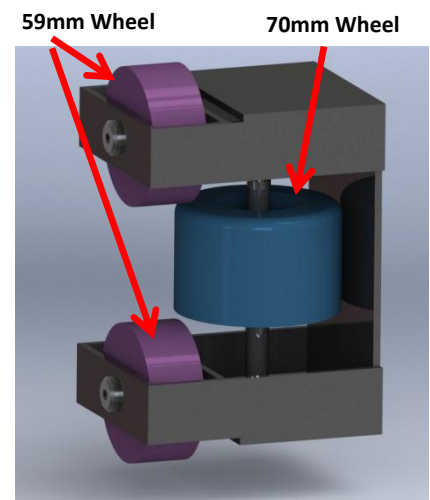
Solid Works assembly of single disk stabilizer. 59mm and 70mm wheels labels.
